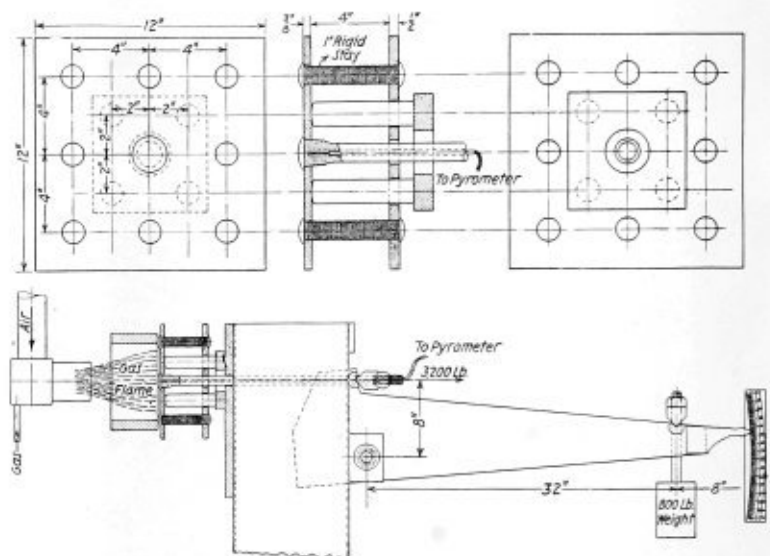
Plan view of testing machine and manner of loading the crown bolts
